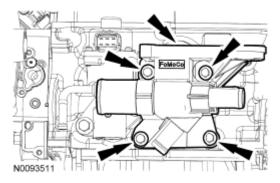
Locating Coolant Bypass Hose Courtesy of FORD MOTOR CO.
